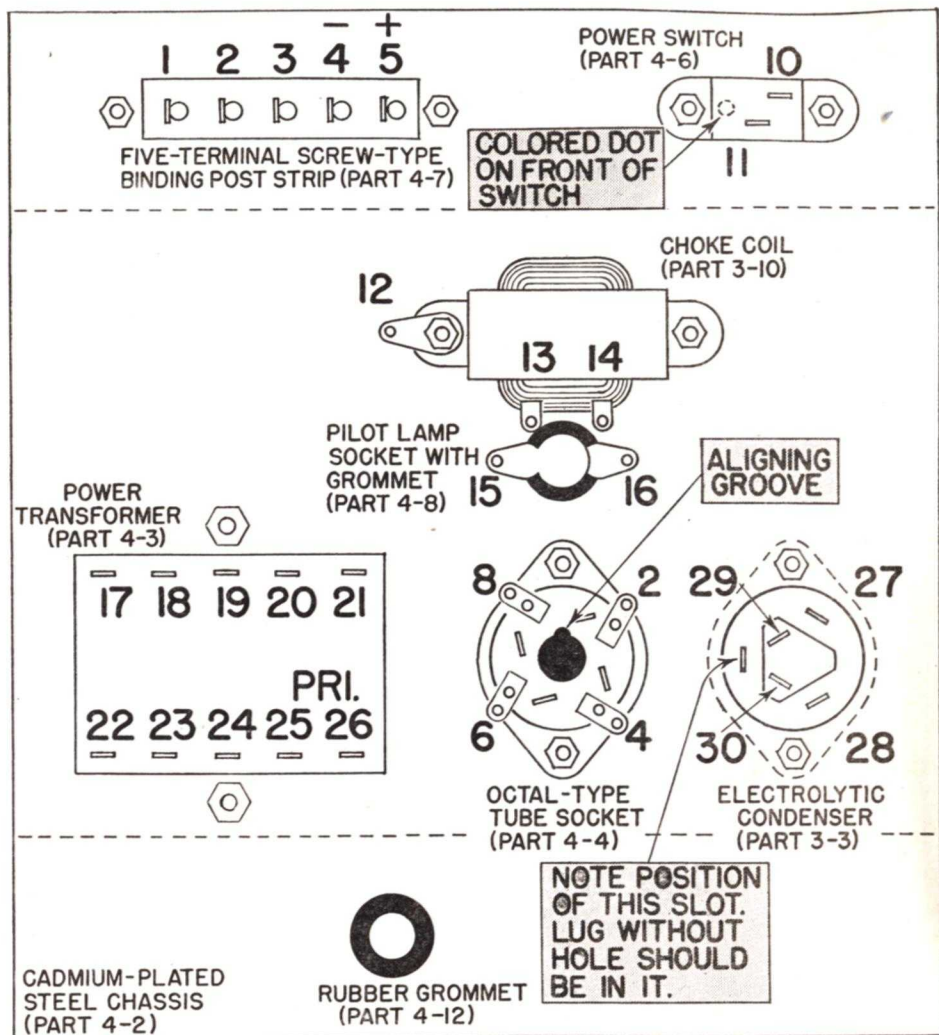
Bottom view of chassis with sides spread out, showing exact positions of all parts which are mounted directly on the chassis, and showing positions of all numbers which you are to place on the chassis and on the parts with metal-marking crayon. The dotted lines indicate the positions of the bends in the chassis.
